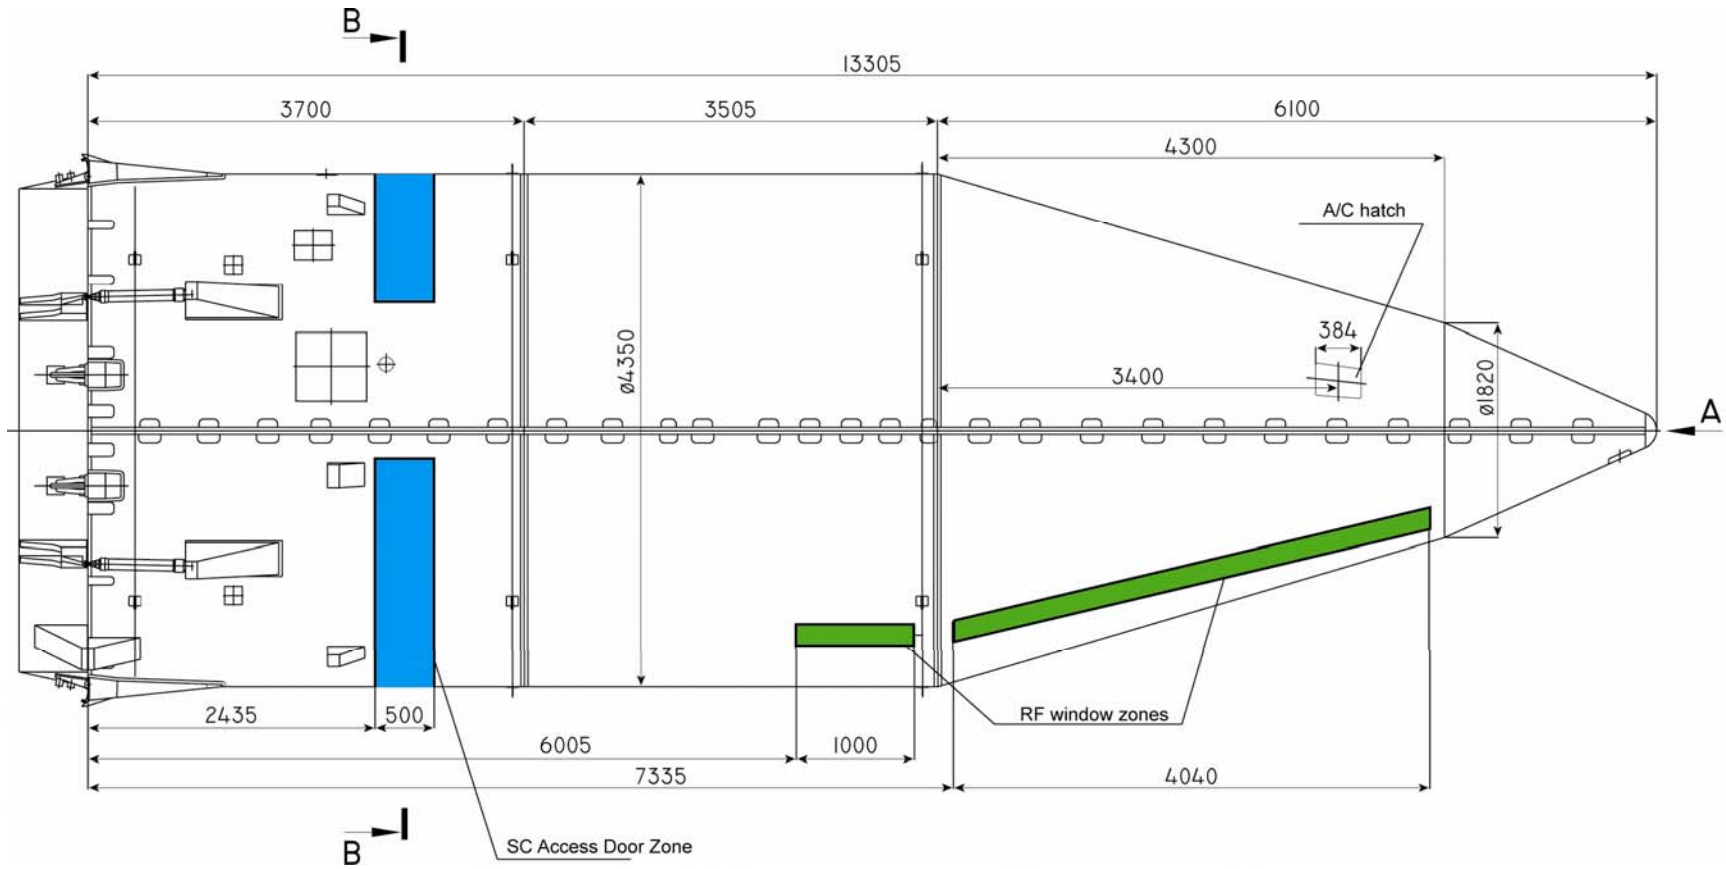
Proton Breeze M PLF-BR-13305 Commercial Fairing General Layout (Sheet 2 of 2)
